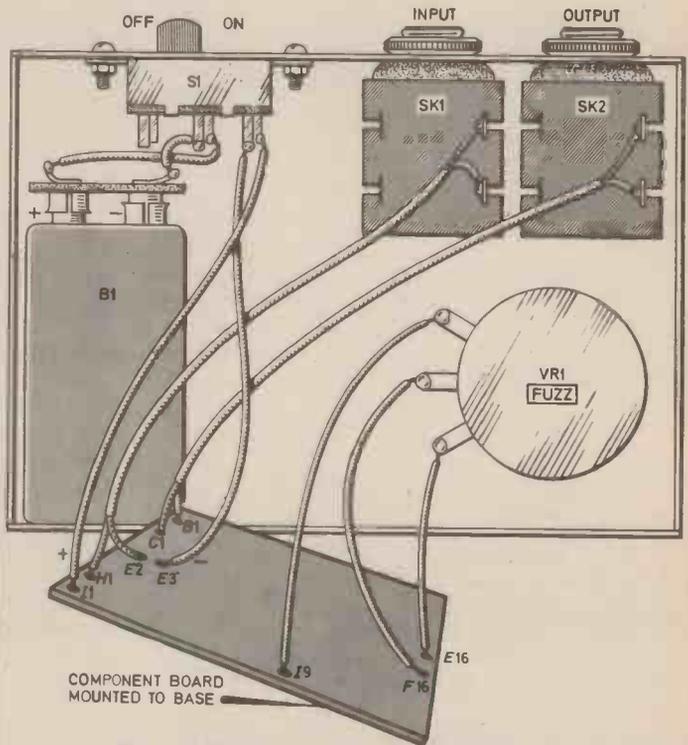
View of the completed fuzz box from below, showing the wiring of the Veroboard to the switch, sockets and potentiometer.
